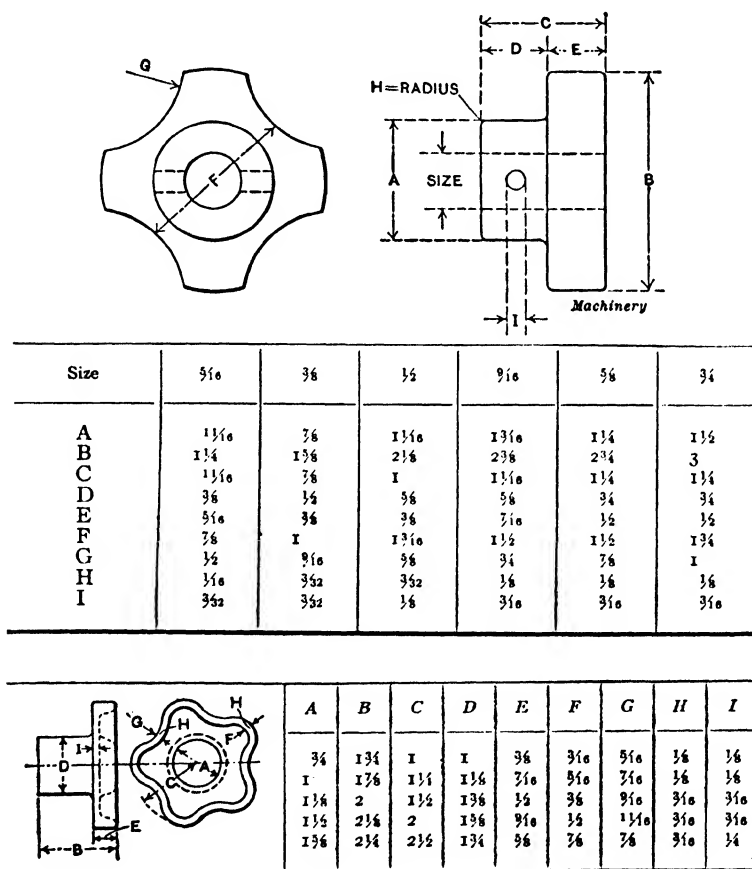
Knobs. *Upper*: Cast-iron knob dimensions. *Lower*: Star handwheel dimensions.
